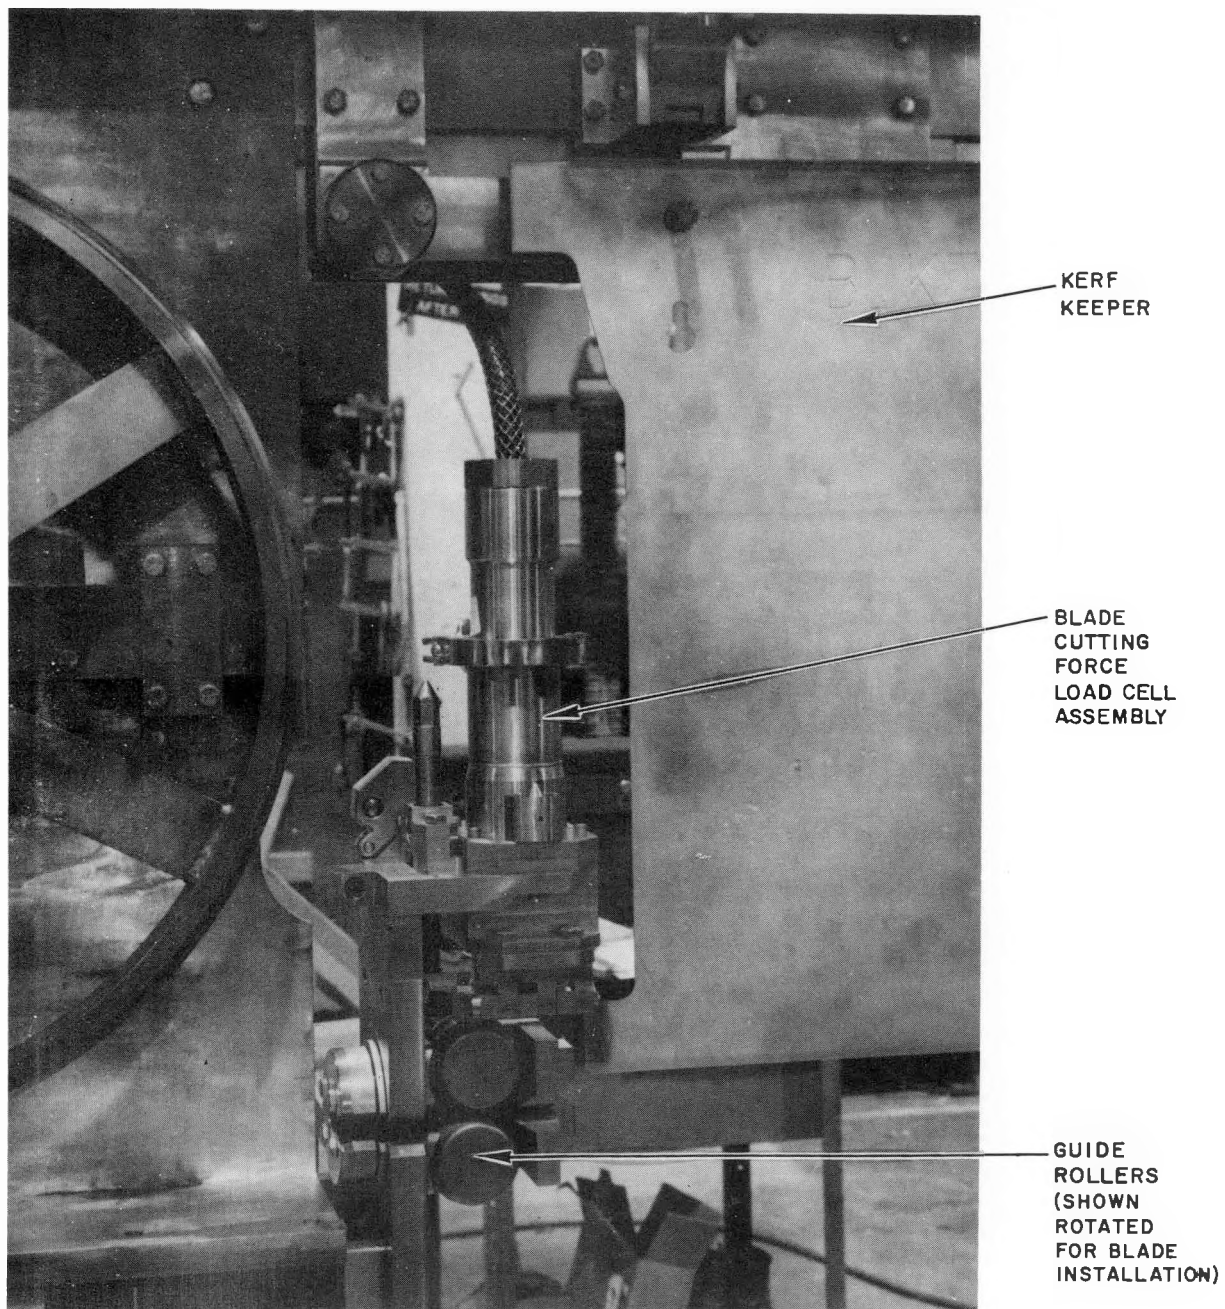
MDA-COS Bandsaw Load Cell Assembly and Blade Guide Rollers
